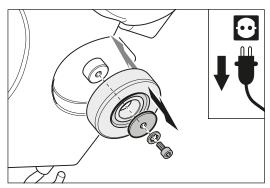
Remove the screw and washers in the center of the lateral wheel and remove the lateral wheel.
